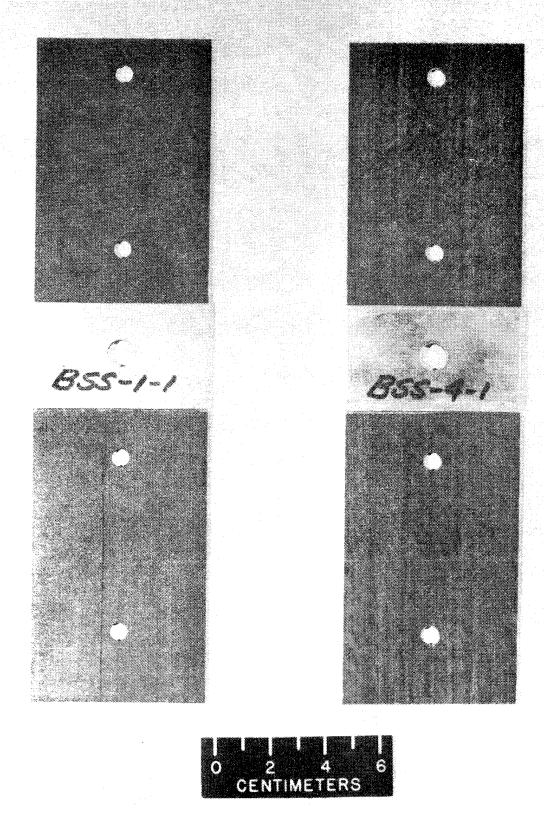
BEARING AND SHEAROUT TEST SPECIMENS
